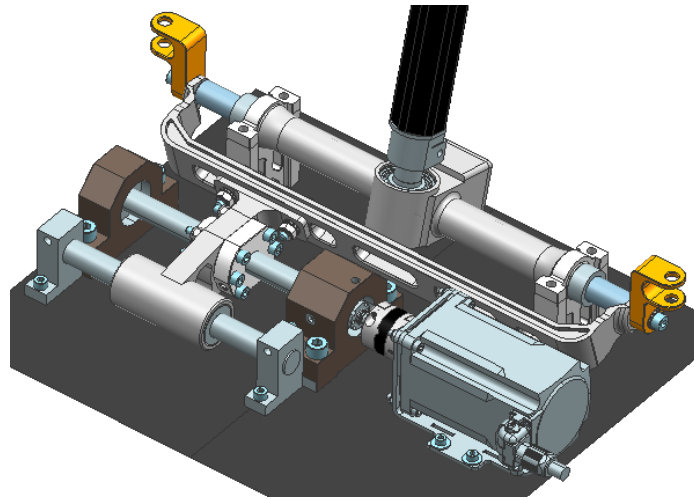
The integrated electric motor and ball screw assembly for steering actuation.
